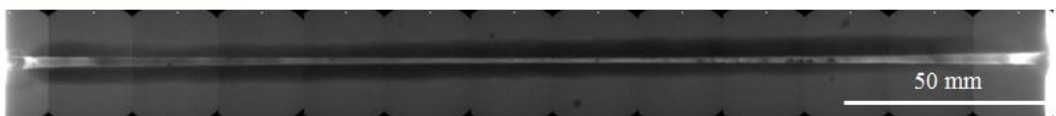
RT result of weld bead having 1.6mm gap and filled with slag pieces - 4
